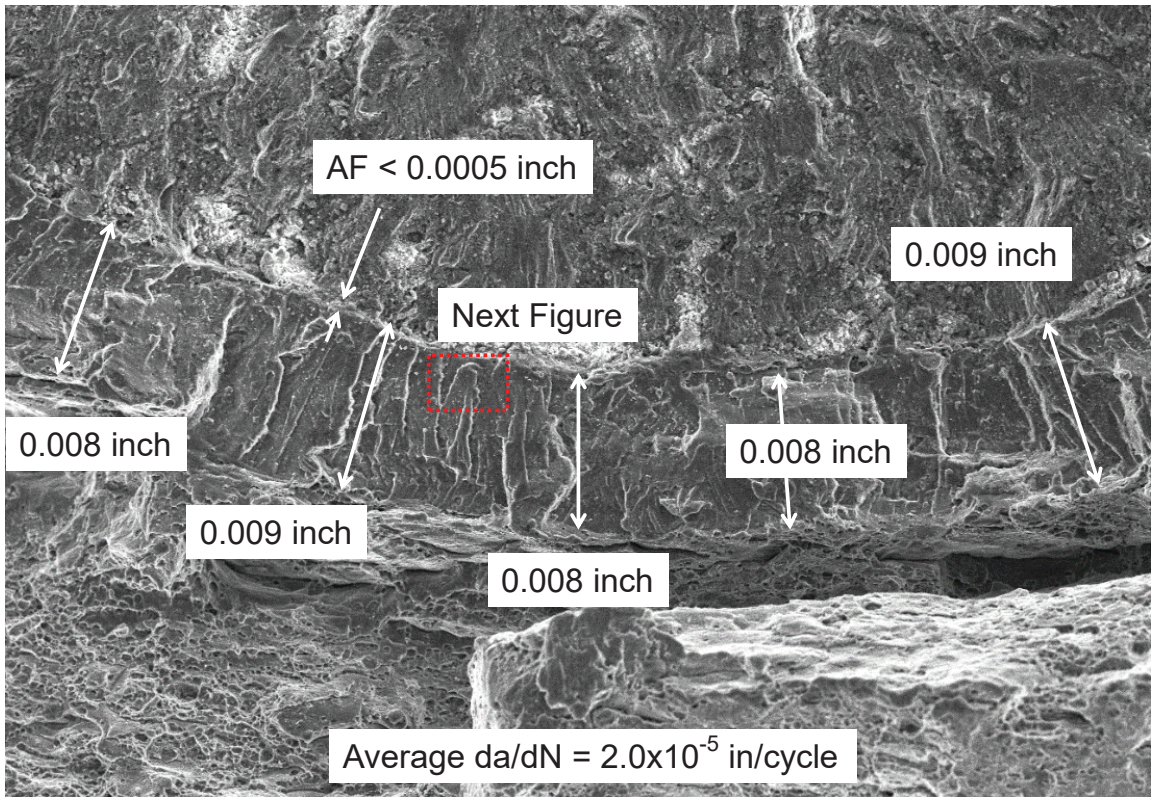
Fracture surface at the maximum depth location for the LEFM-only test UL-P0-02 (LEFM: -30,000 psi to 30,000 psi).
